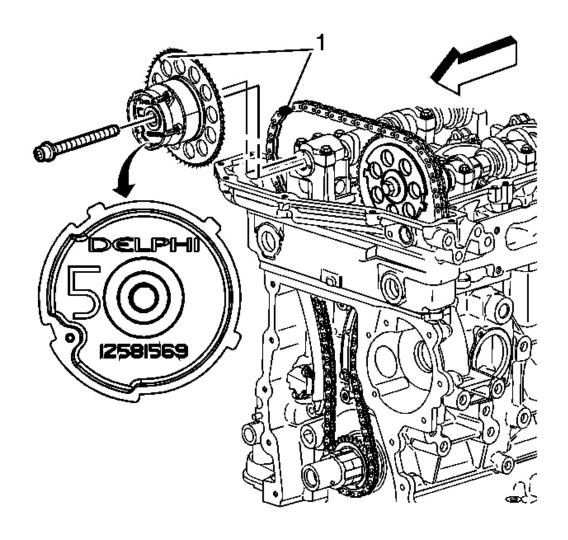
View Of Exhaust Camshaft Actuator Courtesy of GENERAL MOTORS CORP.
